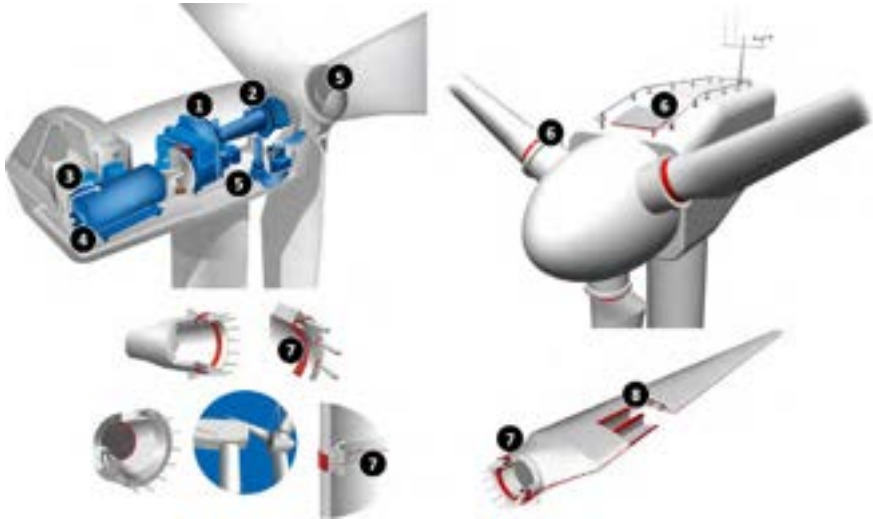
Common engineering adhesive manufacturing applications for wind turbines: (1) gasketing of gearbox flanges; (2) flange coupling in the drivetrain; (3) thread sealing of oil pipes; (4) retaining bearings in the generator; (5) threadlocking of pitch and yaw driver fasteners; (6) sealing of rotor and nacelle components; (7) sealing and reinforcement of rotor and tower flanges; (8) bonding of blade shells, beams, and stiffeners. Credit: Henkel, Adhesive Technologies, www.henkel.com.
